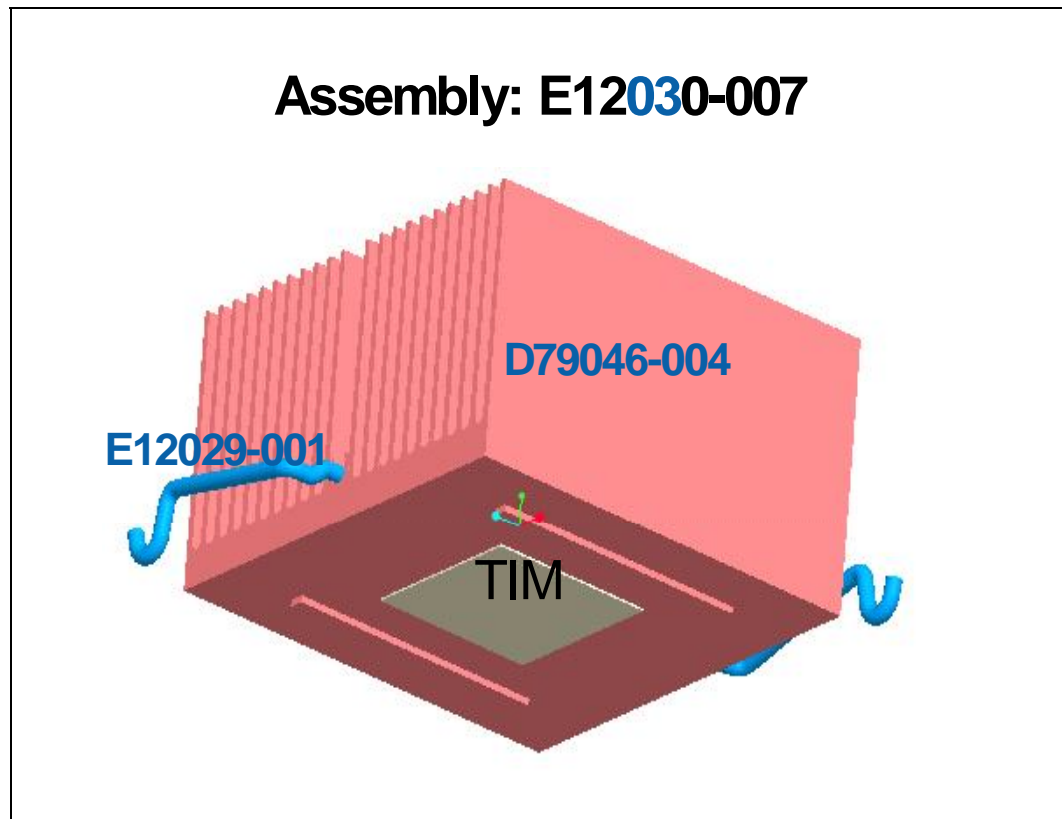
Tall Heatsink and Alternative Clip Assembly
